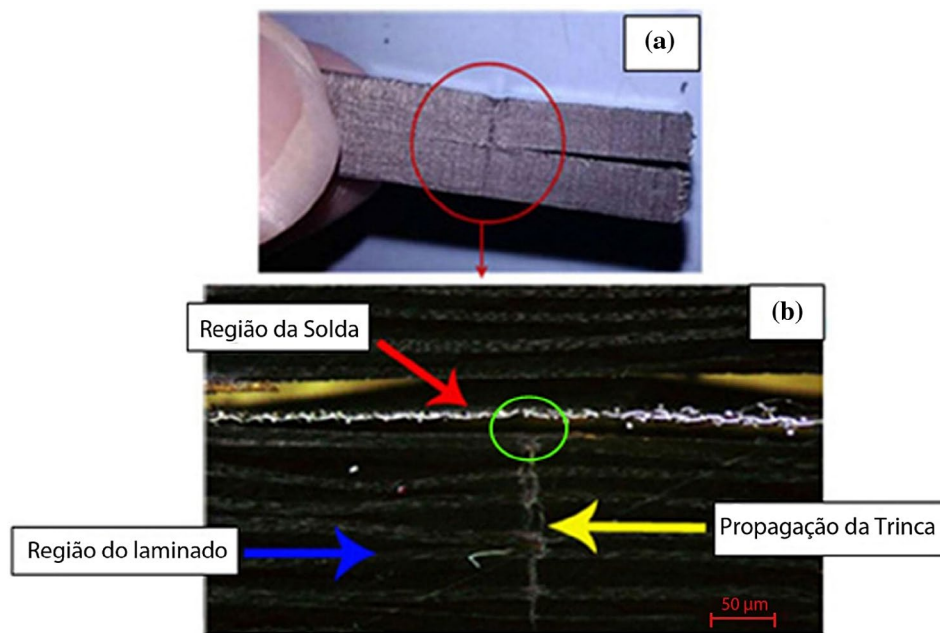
(a) Welded specimen of PEI/carbon fibre composite after the ILSS test; (b) Micrograph showing the start of fracture in the region fractured by the ILSS test of the welded PEI/carbon fibre laminate. Região da Solda = Weld region; Região do laminado = Laminate region; Propagação da Trinca = Crack propagation.
